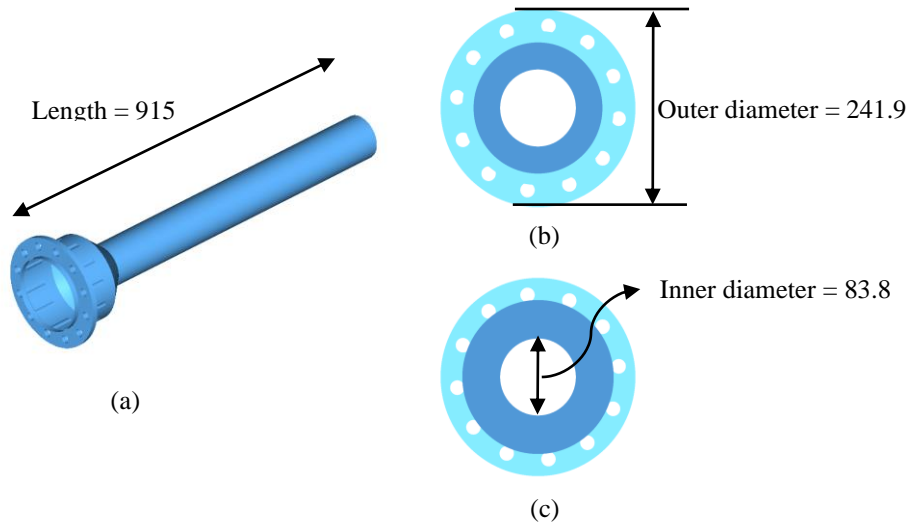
Shaft (a) isometric (b) front and (c) back views.
